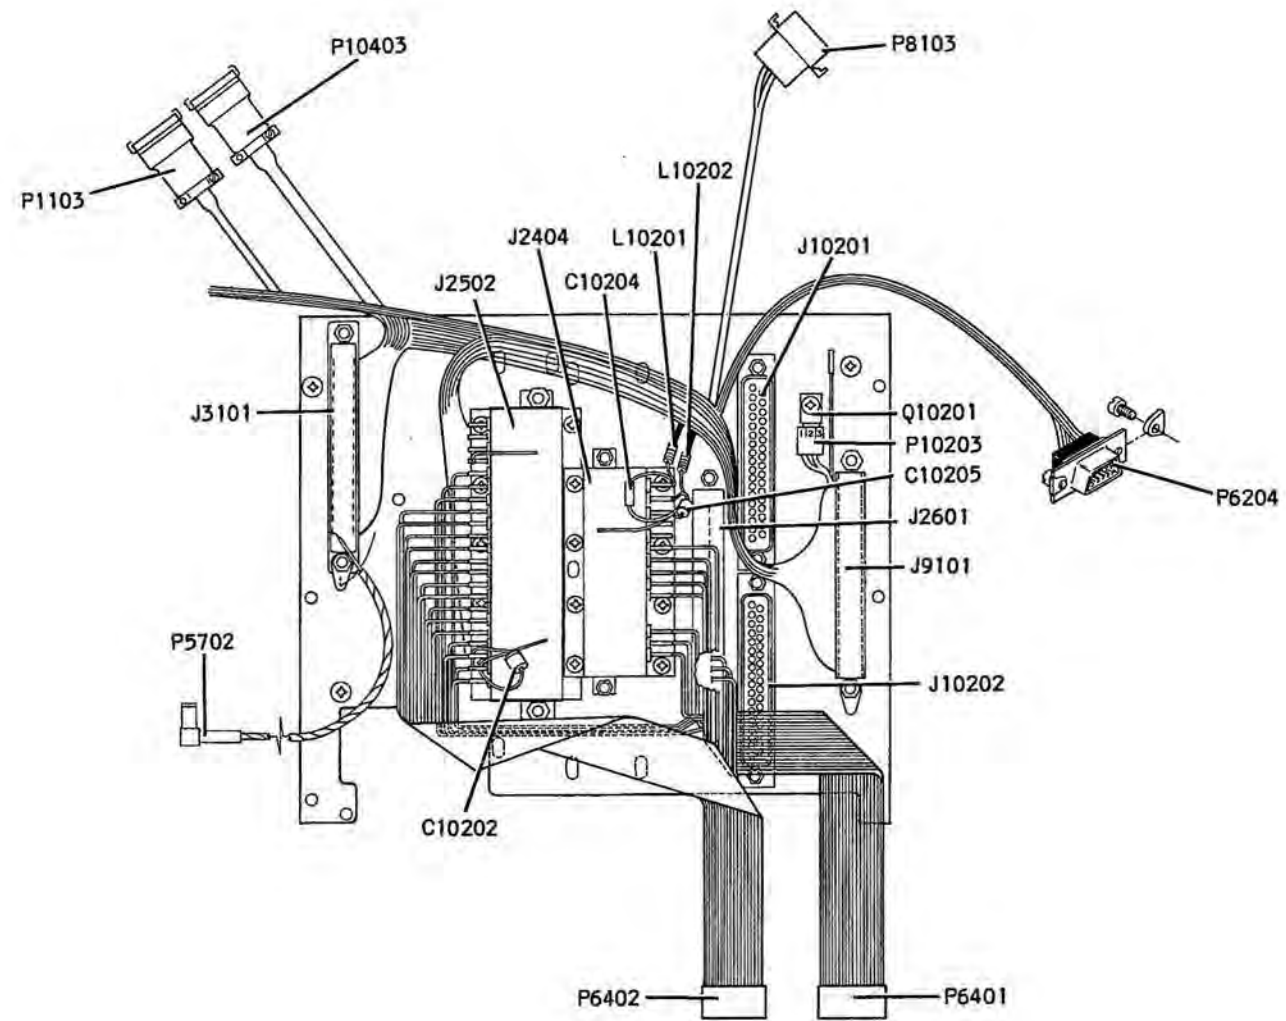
Mother Board Connectors Disassembly and Reassembly
